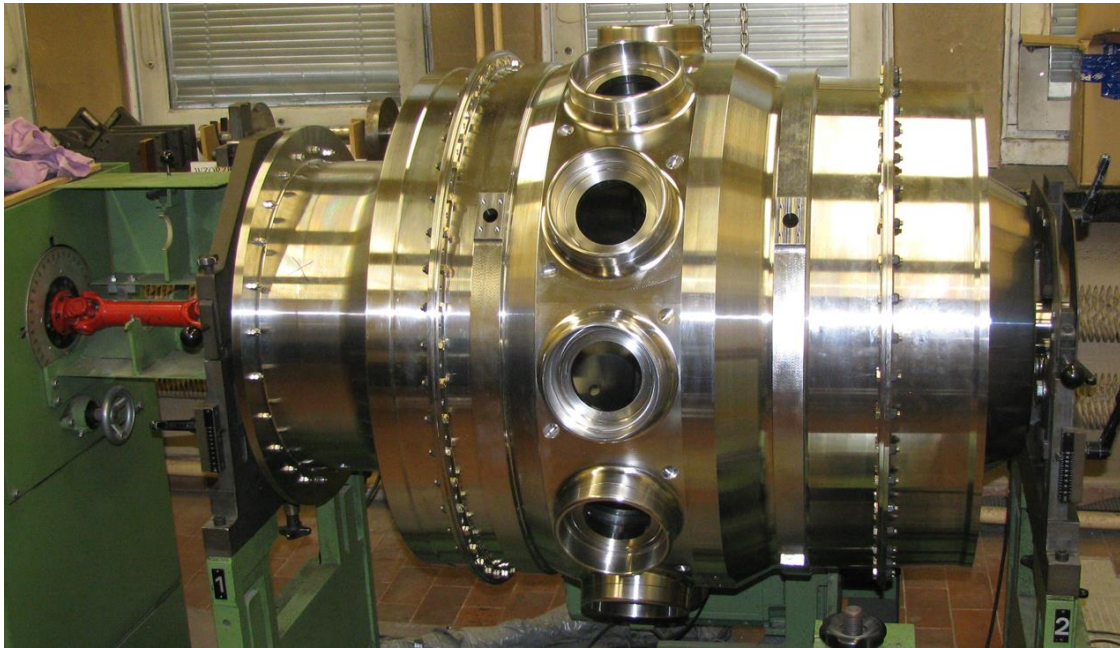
Rotor frame balancing (prior to module assembly) in the WIA facility
